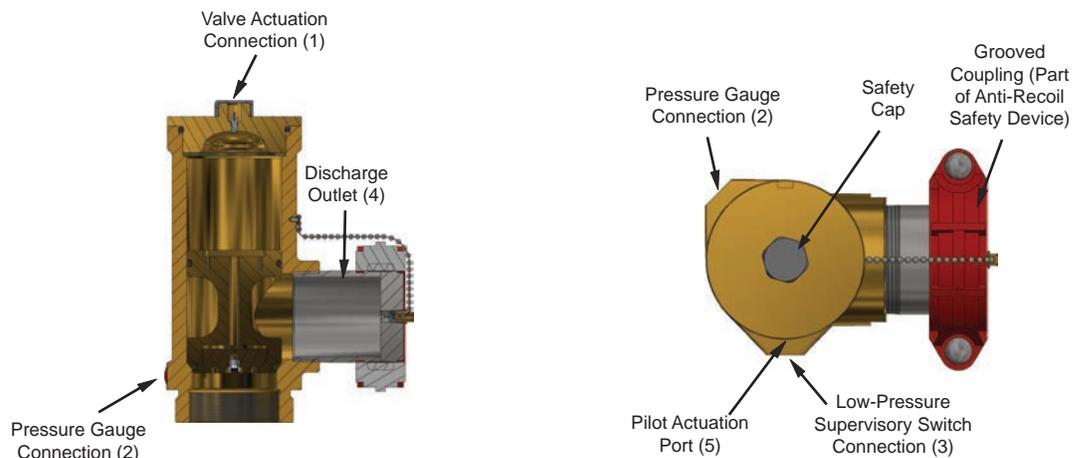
Lv Cylinder Valve Assembly
